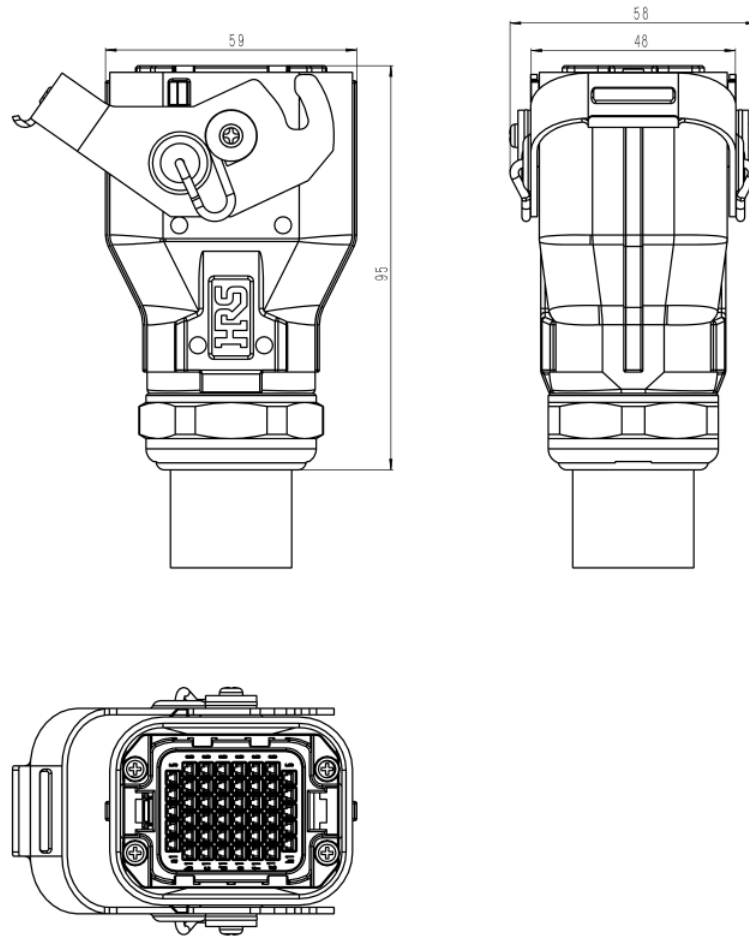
AIR4-560A base bottom outlet heavy-duty plug size
